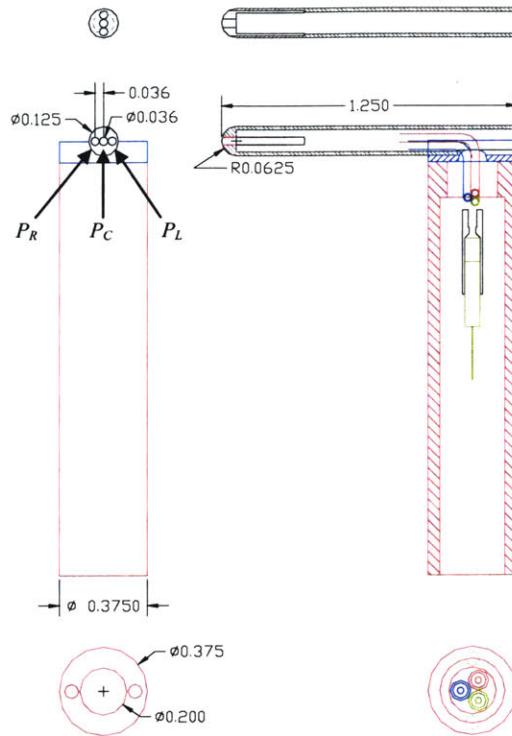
Front (left) and Side (right) Views of Flow Angle Probe Tube and Stem
